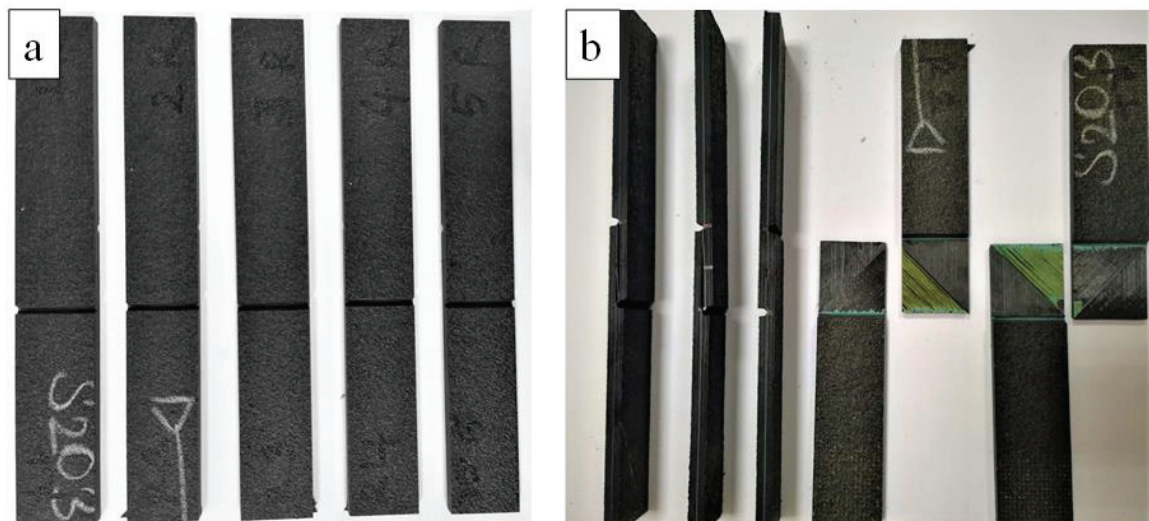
1. Single lap shear reference test specimen produced with the secondary bonding method a) Before the test b) After the test (the fracture surface)
